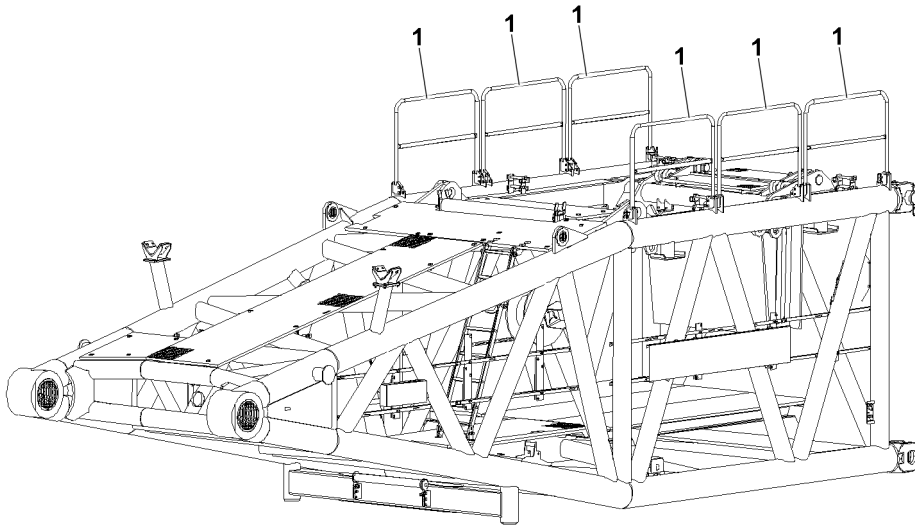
Fall protection equipment on the boom pivot sections and on the lattice sections — prerequisites
